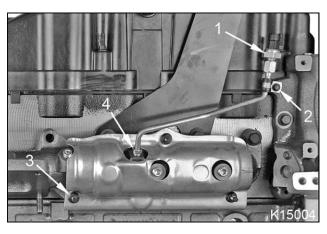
EBP tube assembly and front exhaust manifold heat shield
